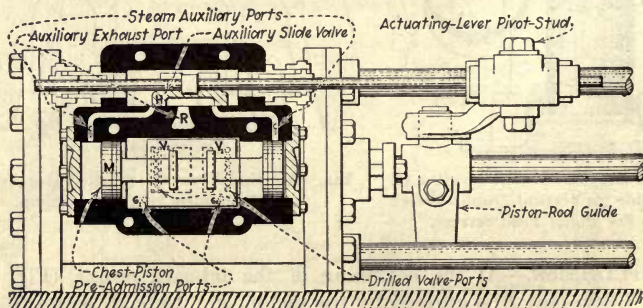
Plan Of Steam-Valve Gear Of Burnham Direct-Acting Simplex Steam-Pump.
